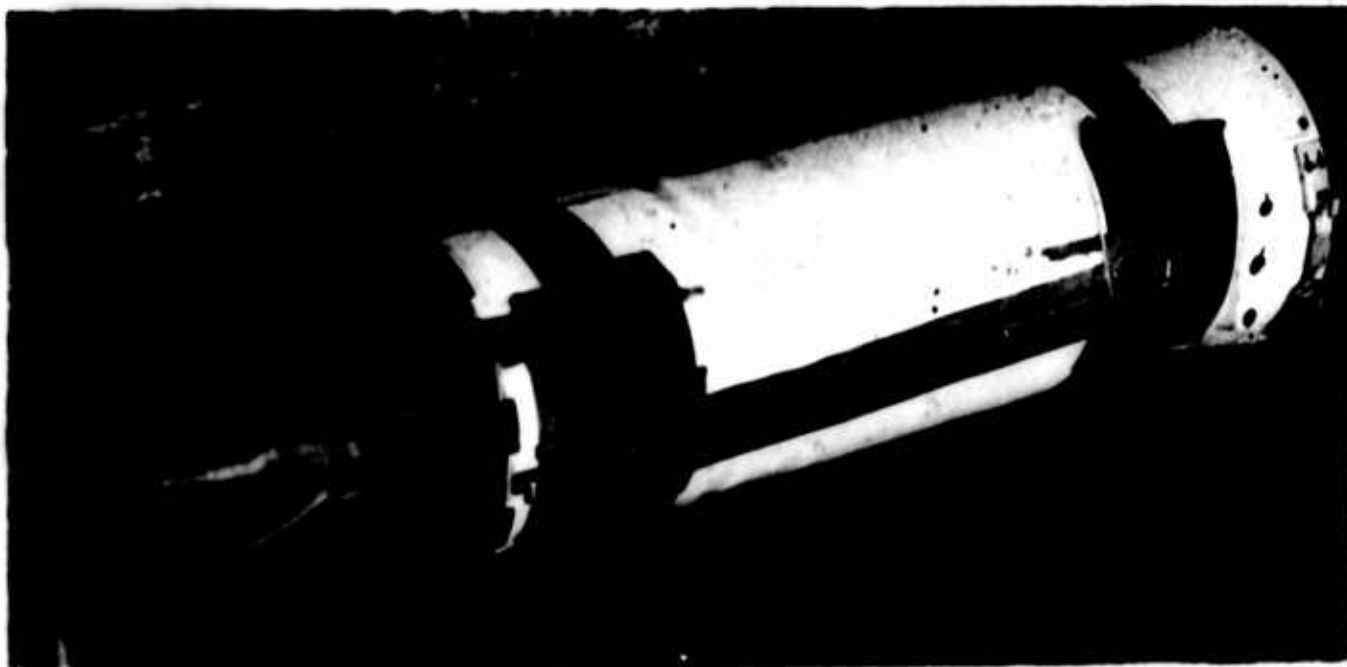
A PHOTOGRAPH OF THE FLEXIBLE LINEAR SHAPED CHARGE INSTALLATION FOR TEST 1.
